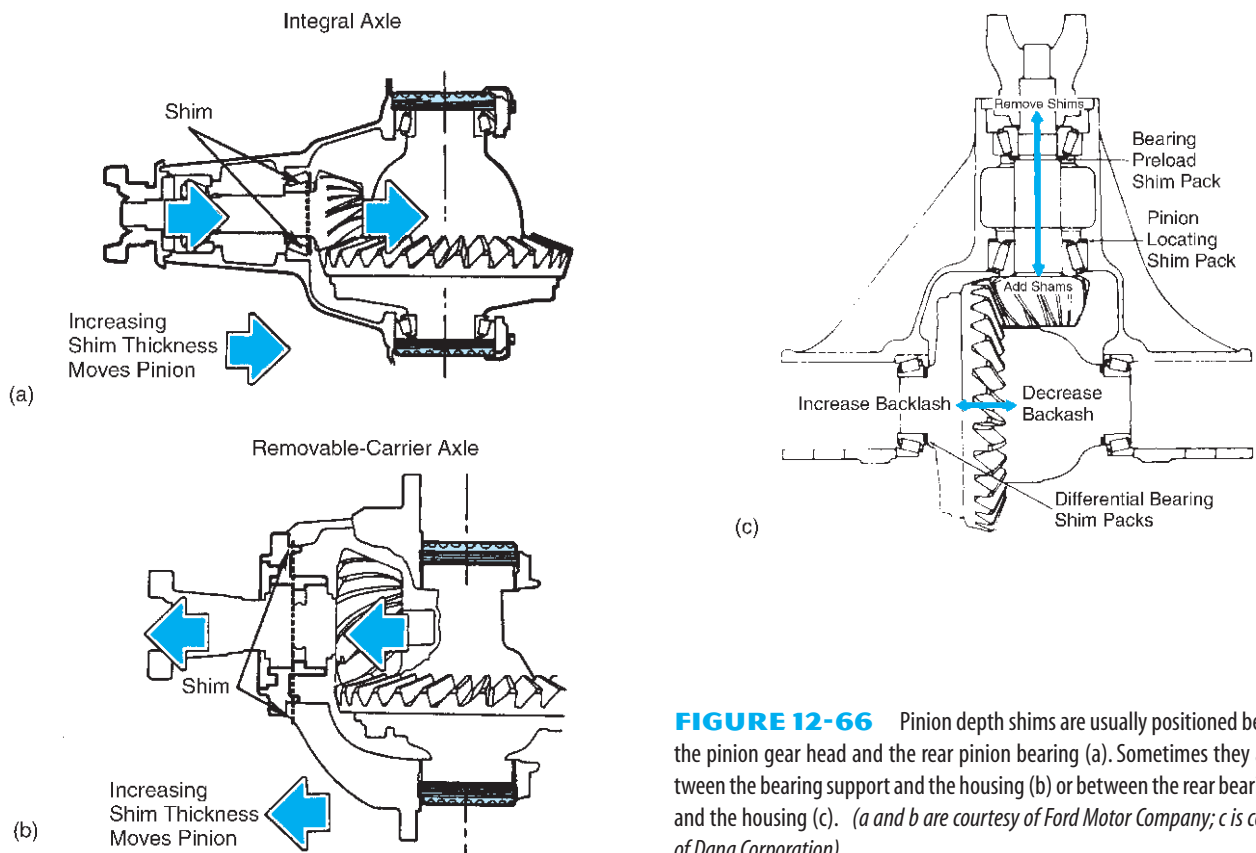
Pinion depth shims are usually positioned between the pinion gear head and the rear pinion bearing (a). Sometimes they are between the bearing support and the housing (b) or between the rear bearing cup and the housing (c). (a and b are courtesy of Ford Motor Company; c is courtesy of Dana Corporation)
